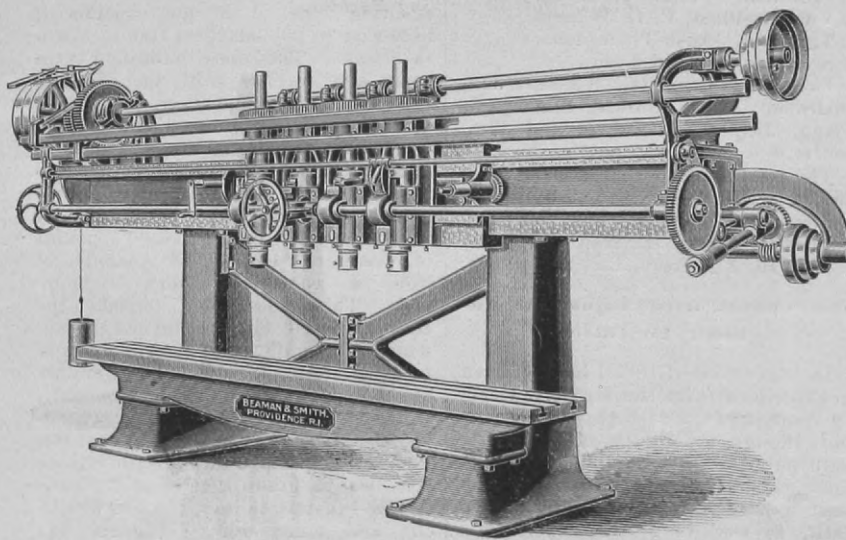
Four-Spindle Upright Boring and Tapping Machine.
